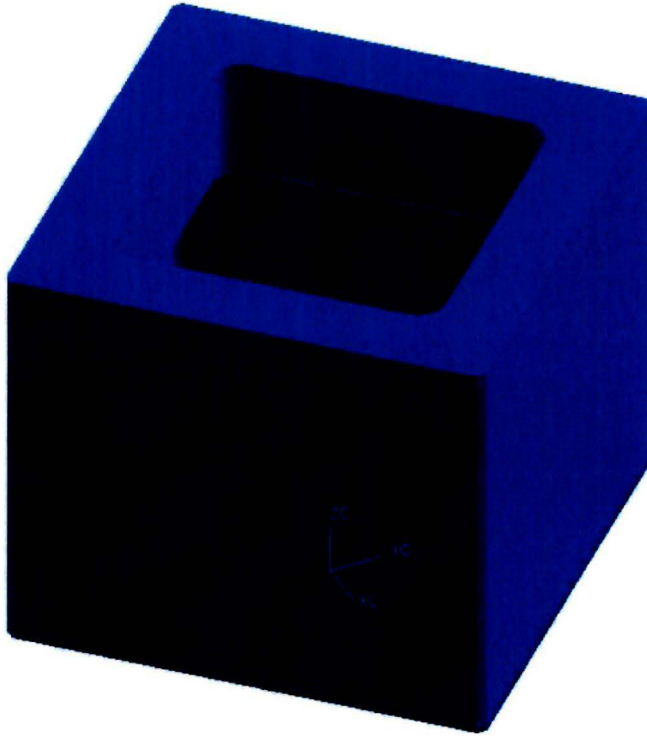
Open box construction with a reinforcement frame at the top edge
